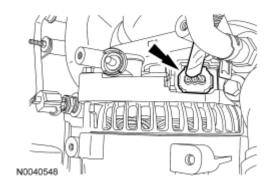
Generator Electrical Connector Courtesy of FORD MOTOR CO.
